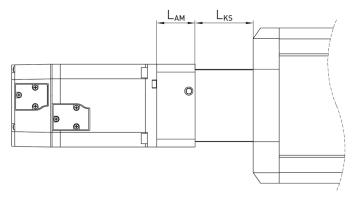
Motor connection of linear modules HM-S without belt drive
